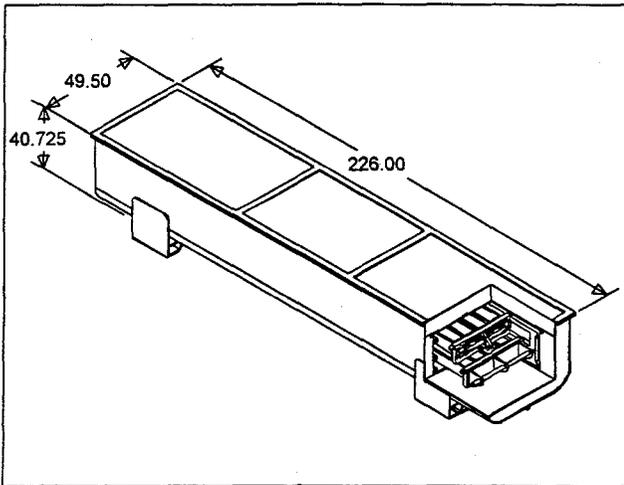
Cutaway view of double-strongback MOX package concept for PWR fuel
